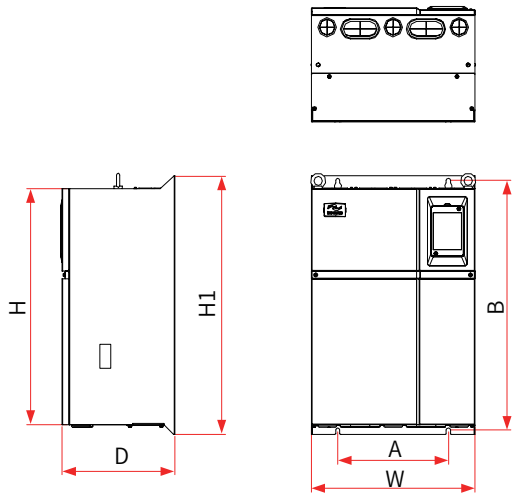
Schematic diagram of outline dimensions and mounting hole dimensions
